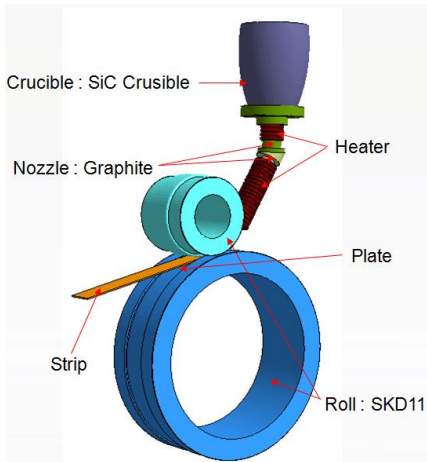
Hybrid strip casting with asymmetric roll. Molten Al to be poured over moving Cu plate or foil.
